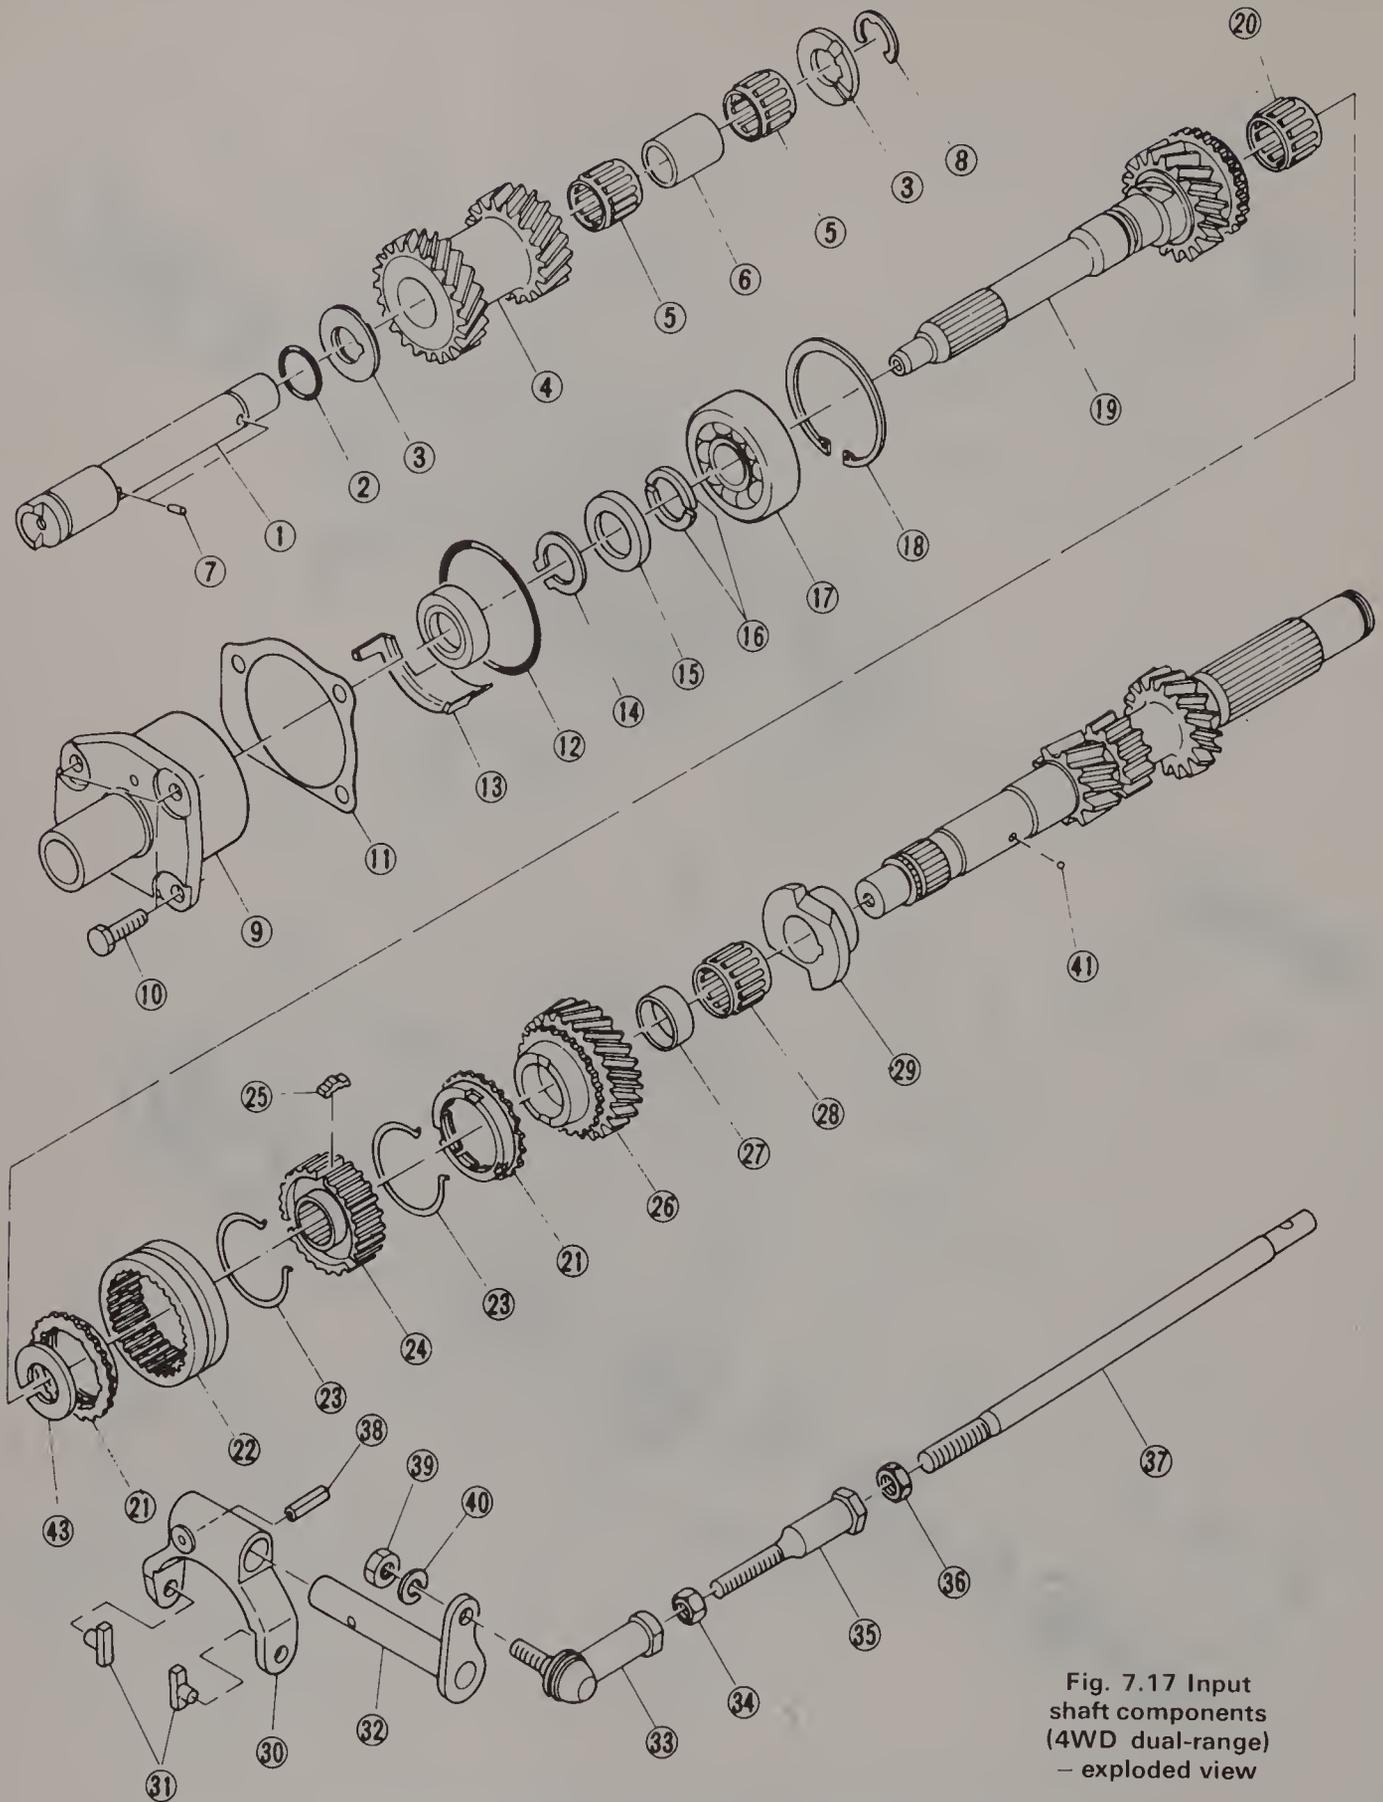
Input shaft components (4WD dual-range) - exploded view
